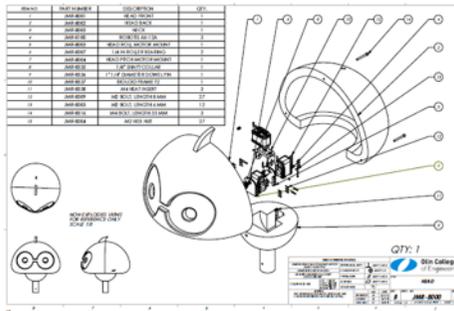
Mechanical drawing and parts list for Jimmy R's head
